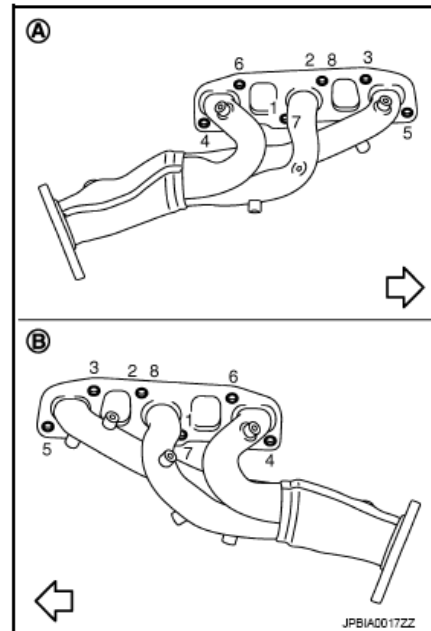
Identifying Exhaust Manifold Mounting Bolts Tightening Sequence
